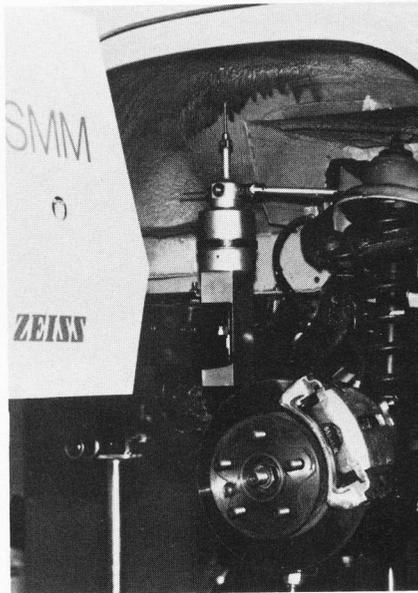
Adjustment of the chassis geometry of a four wheel drive vehicle look at the probe showing up
